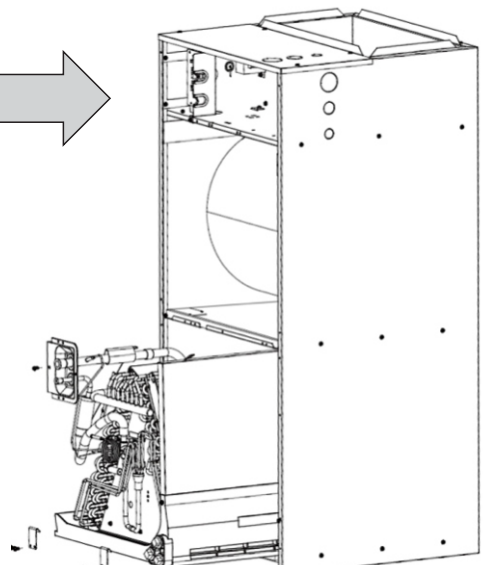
G – Evaporator and Drain Pan Assembly Removal
